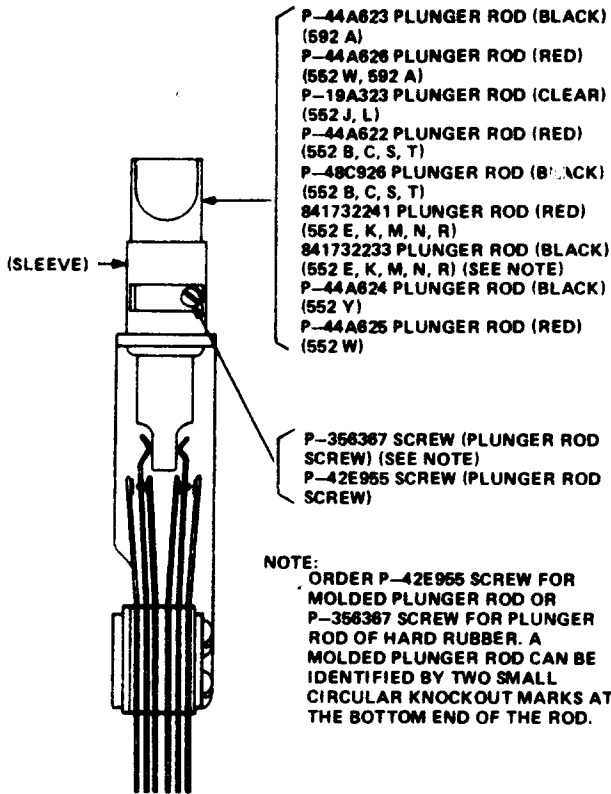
552- and 592-Type Keys (552J Illustrated)
